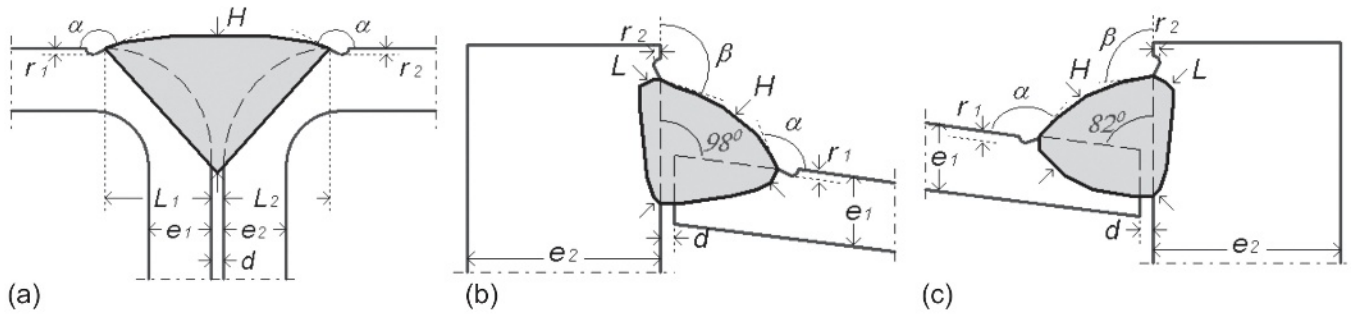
Dimensional specifications of joints: A — JR; B — JCI; C — JCE.
